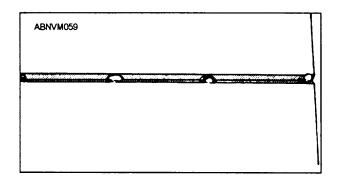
Plates tack-welded and aligned for GMA welding.
